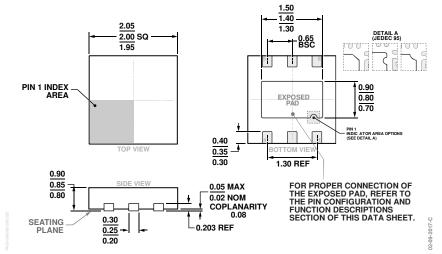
6-Lead Lead Frame Chip Scale Package [LFCSP] 2 mm × 2 mm Body and 0.85 mm Package Height (CP-6-10) Dimensions shown in millimeters
